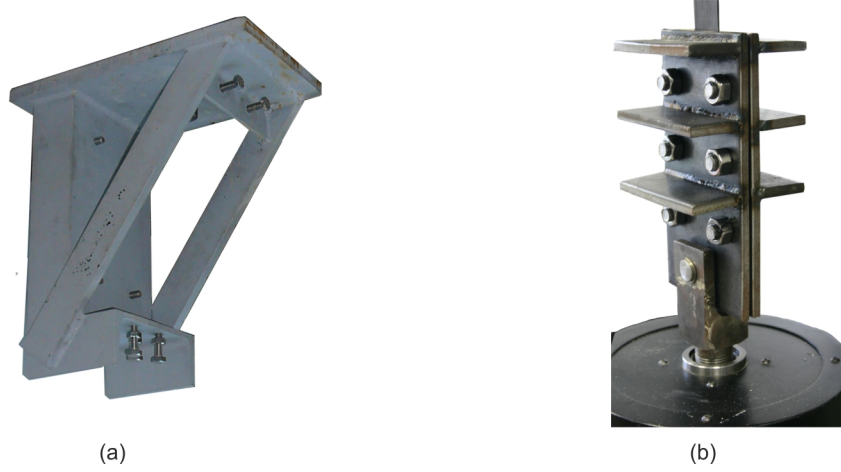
(a) Steel support cage and (b) particular of the clamping system.
